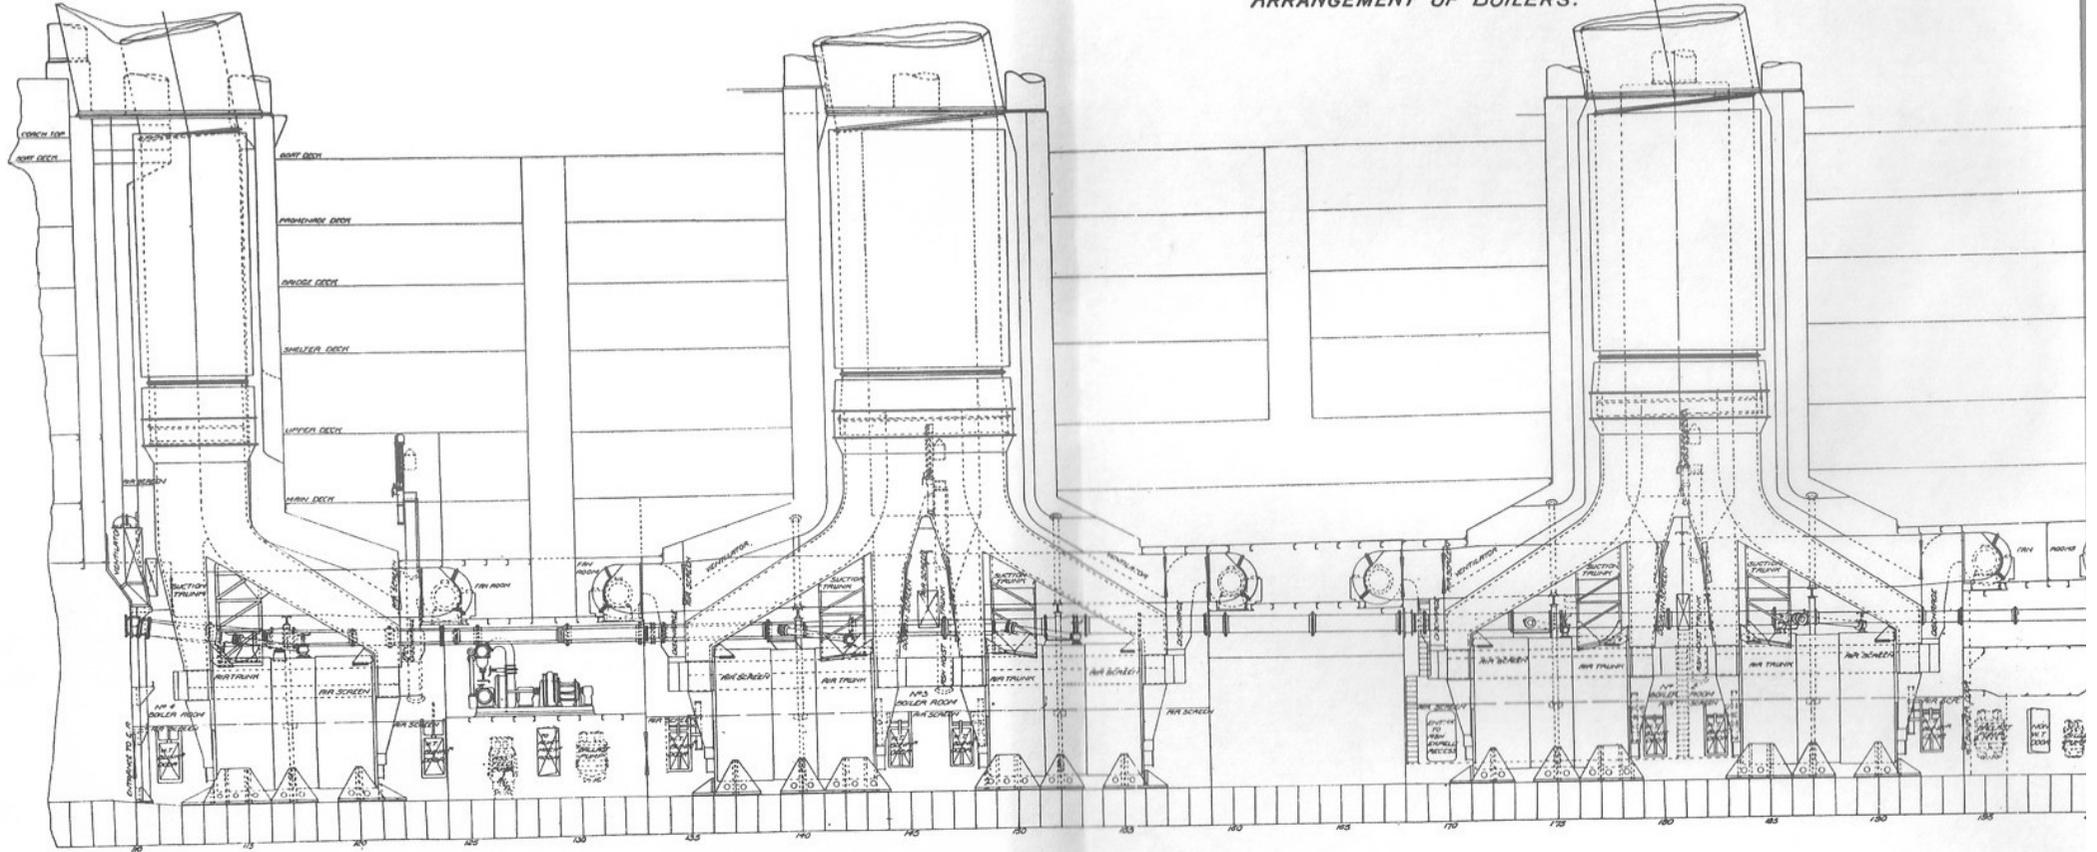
Elevation of boiler rooms up to the ER bulkhead
